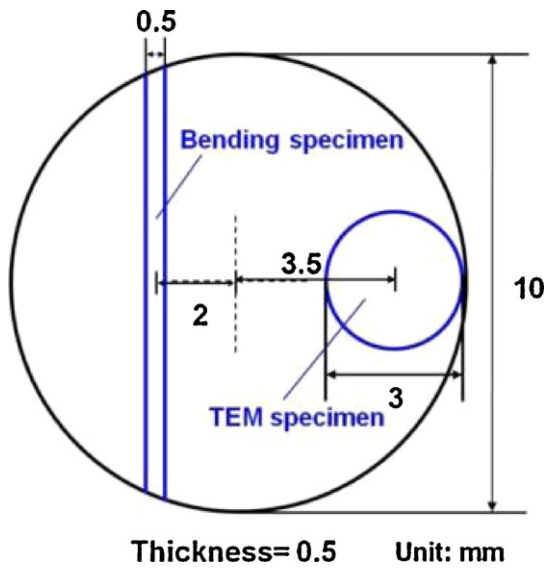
Dimensions of HPT disk sample showing positions for TEM and bending specimens.
